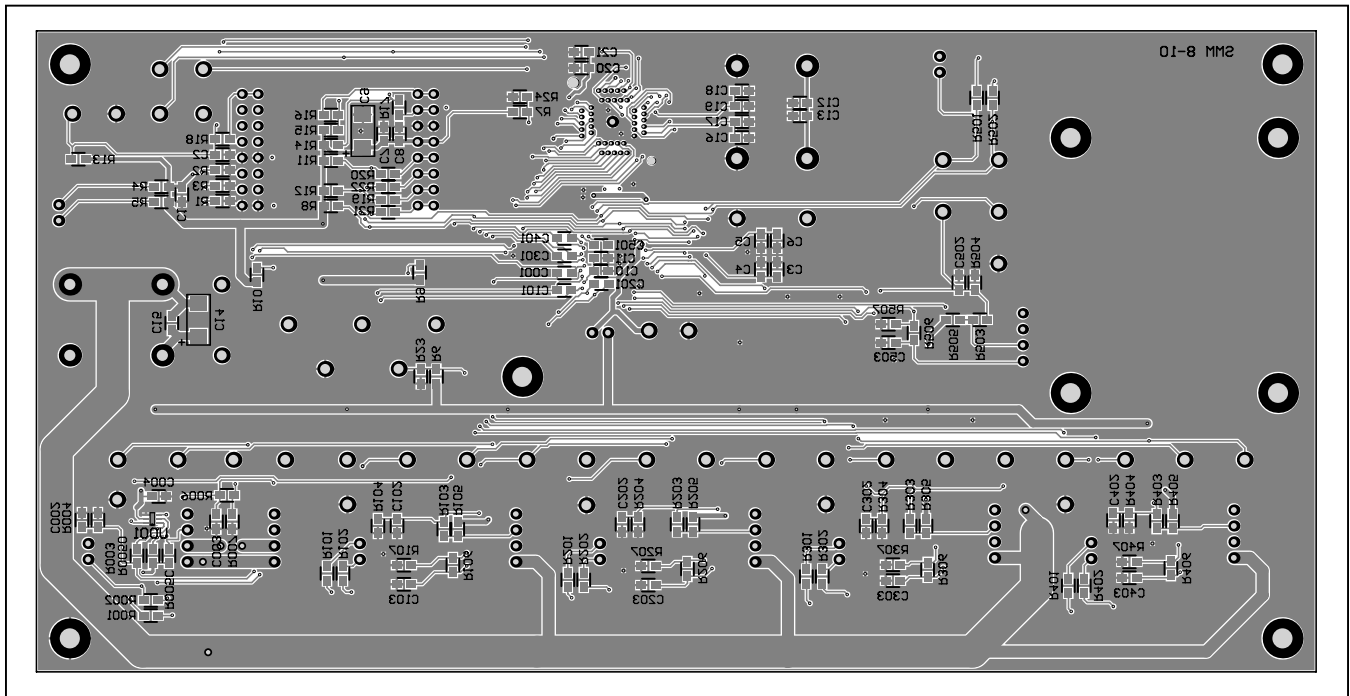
MAX31785 EV Kit PCB Layout—Bottom
